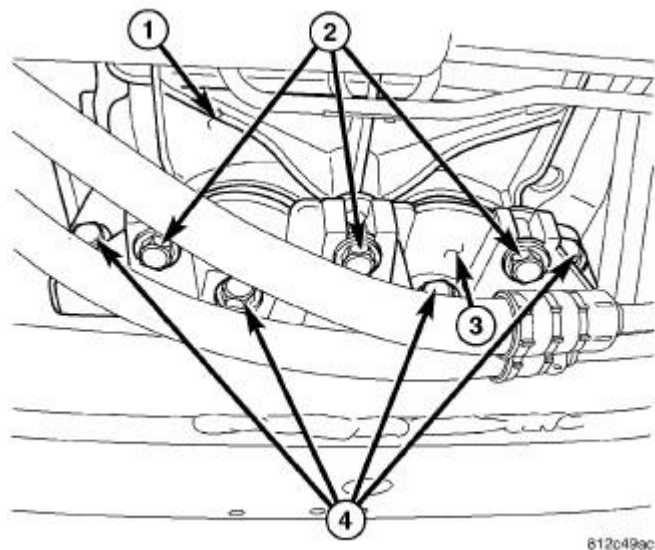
Removing/Installing Structural Collar Bolts At Oil Pan & Transmission Bell Housing
